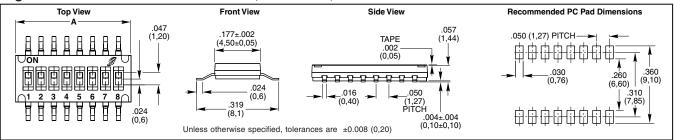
Series 97R DIMENSIONS In inches (and millimeters)
